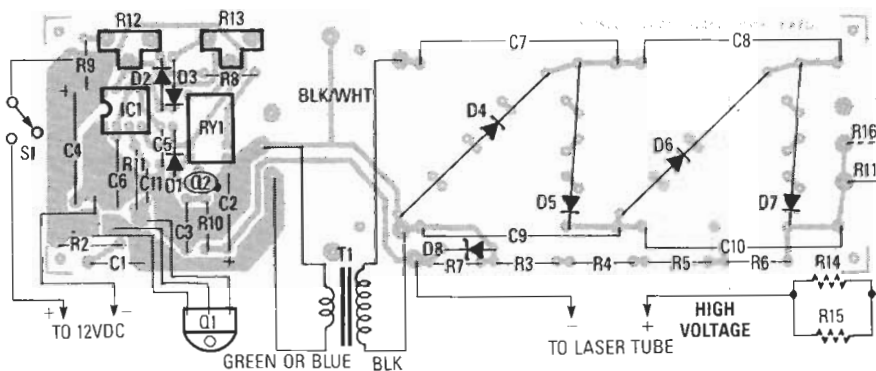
THE PARTS LAYOUT. Although R16 mounts on the PC board, R15 and R16 are spliced into the laser tube's anode wire.
